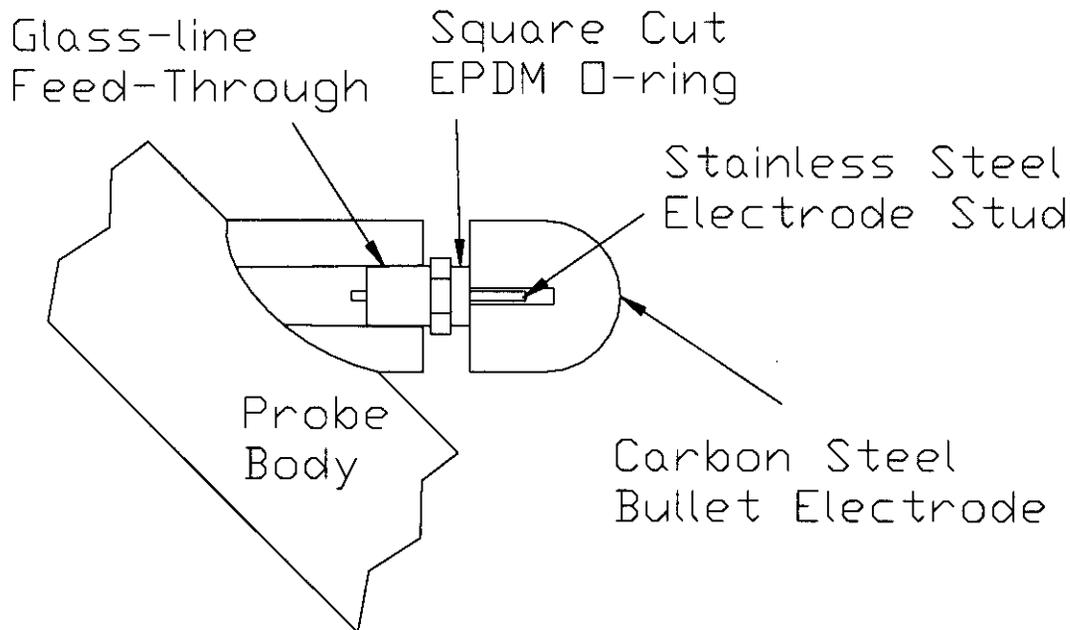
Square cut O-ring gasket design for sealing surface used on first corrosion probes
